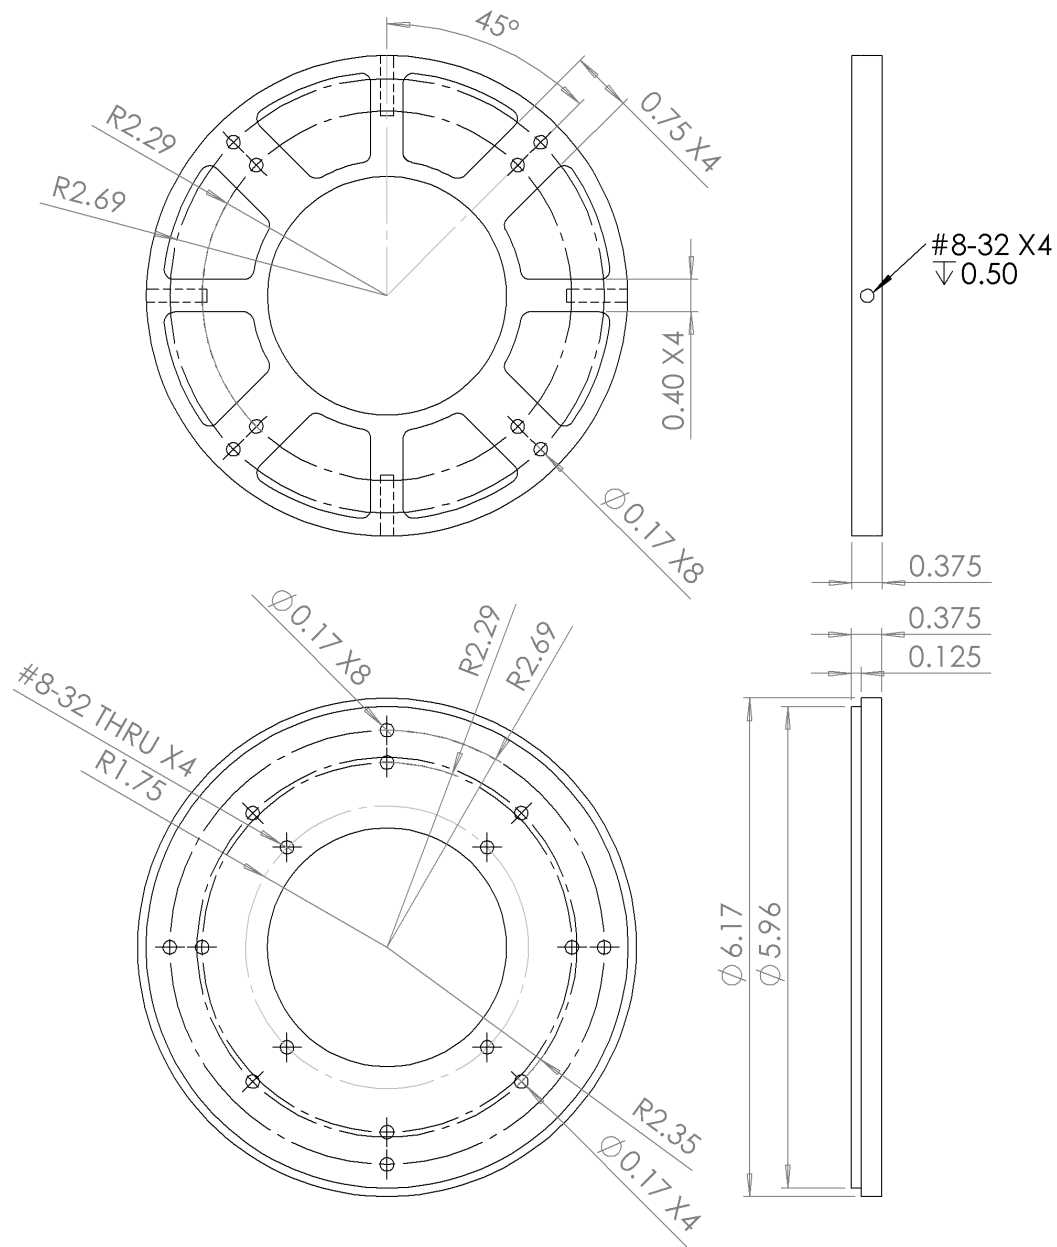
RMFS forward centering ring and thrust bulkhead dimensions [in.]
